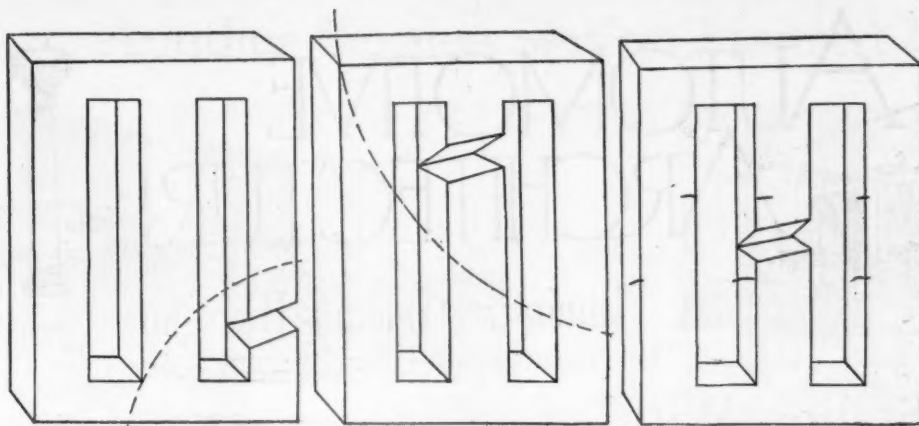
A, B and C. The preheating necessary in the case of welding each break is described on this page
